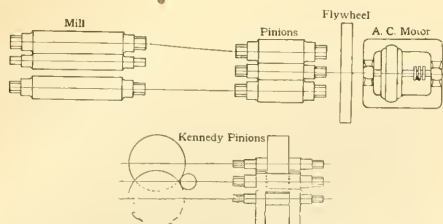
TYPICAL DRIVE FOR THREE HIGH PLATE MILL
